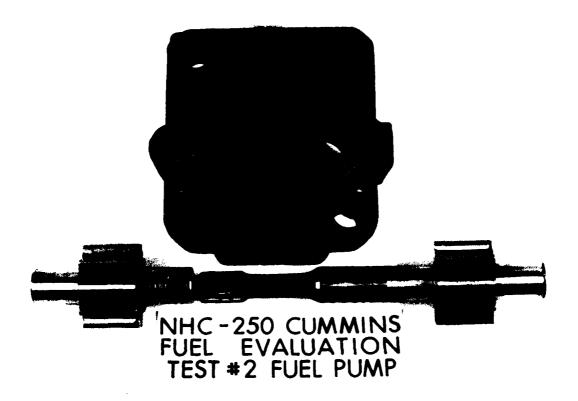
Photograph of injection pump gears, NHC-250/JP-8
